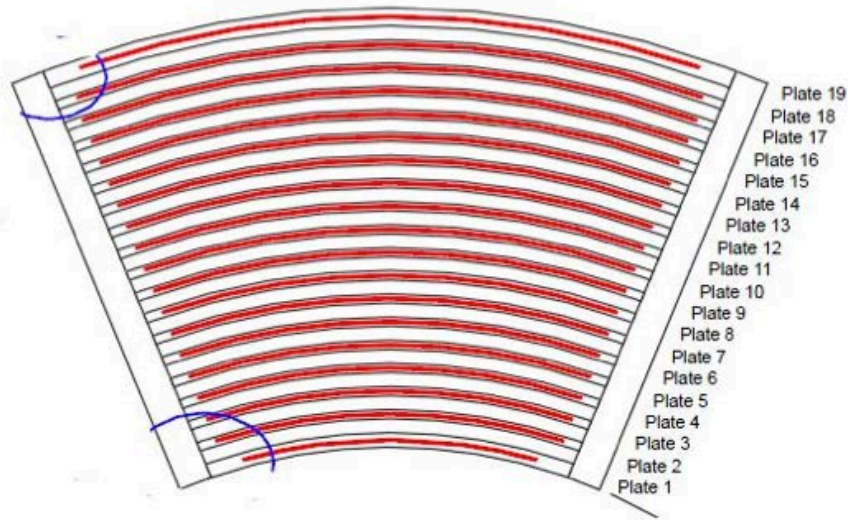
ATR fuel assembly. Image courtesy Ref. [9].
